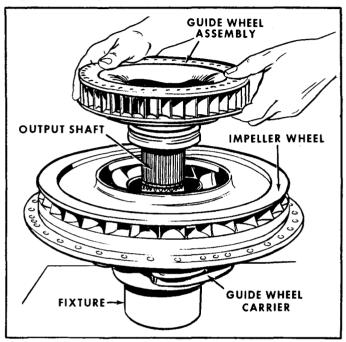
Installing the Guide Wheel Assembly on the Guide Wheel Carrier.
